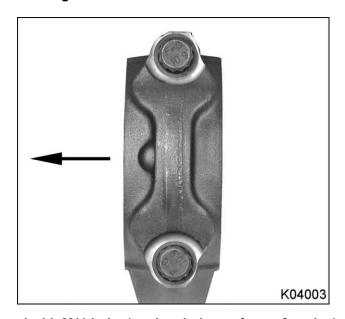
Connecting rod with M11 bolts (mark pointing to front of engine)
